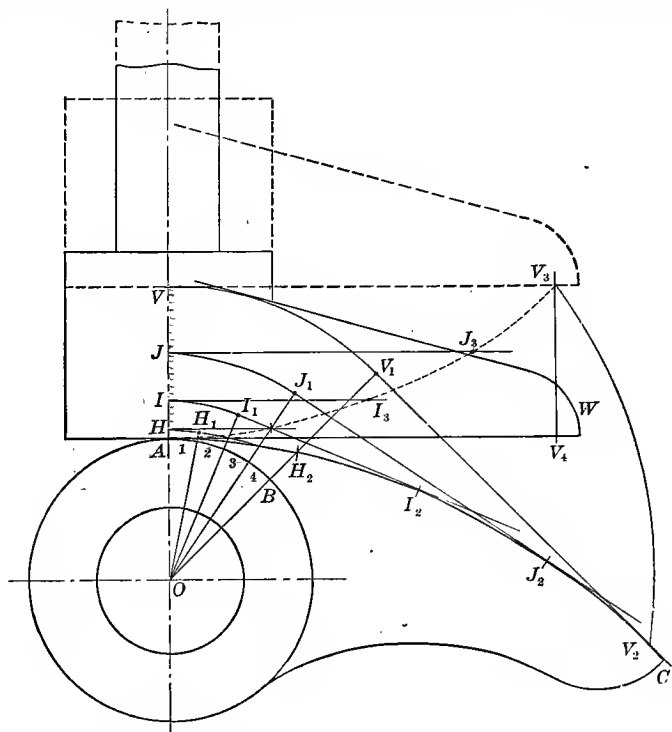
PROBLEM 12, TOE AND WIPER CAM
